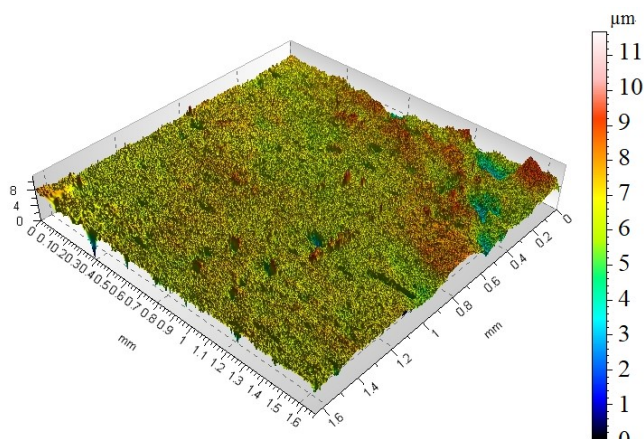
Three-dimensional optical surfaces of the brass bushing before machining. $S_a = 0.5752 \mu\text{m}$
